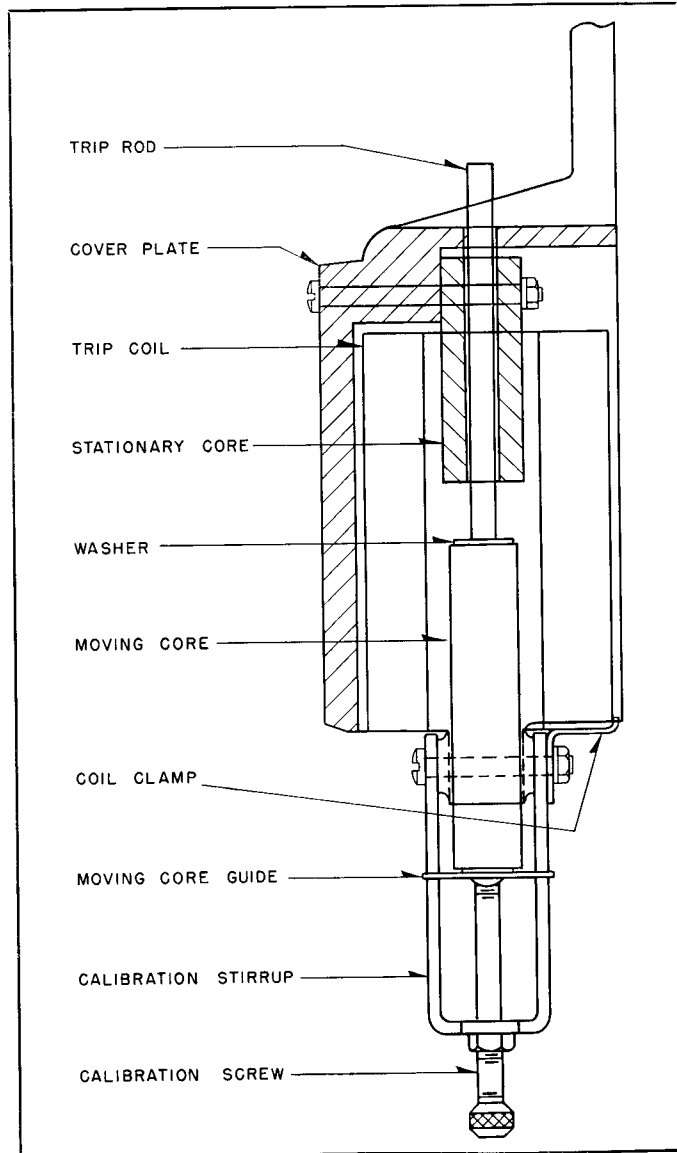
Shunt Trip and Instantaneous Trip Assembly.
